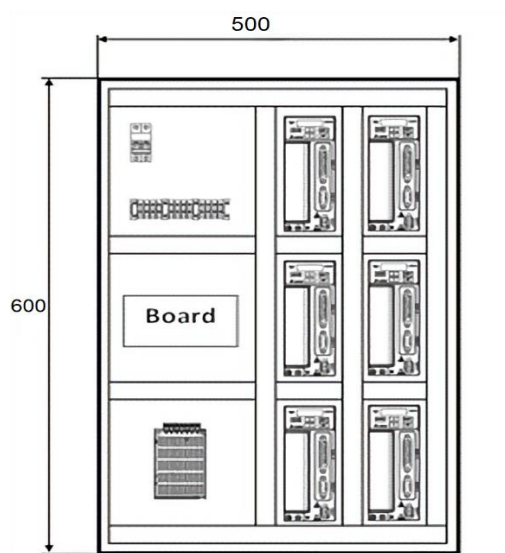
Diagram of the layout of devices in electrical cabinets.
